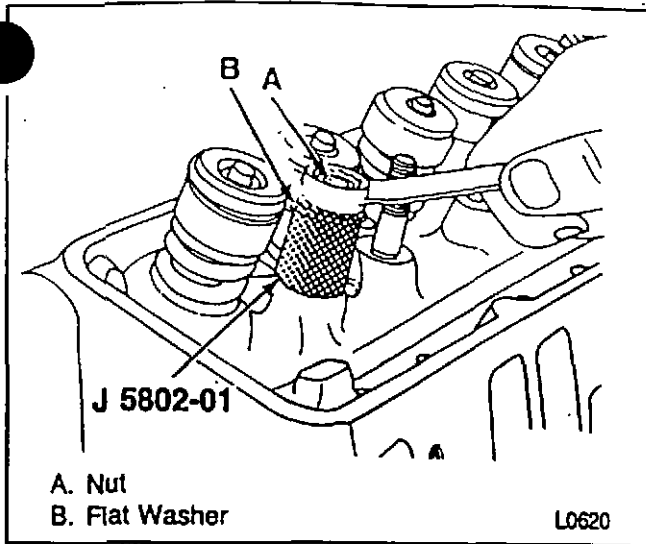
Removing the Rocker Arm Stud (5.0L and 5.7L Engines)
